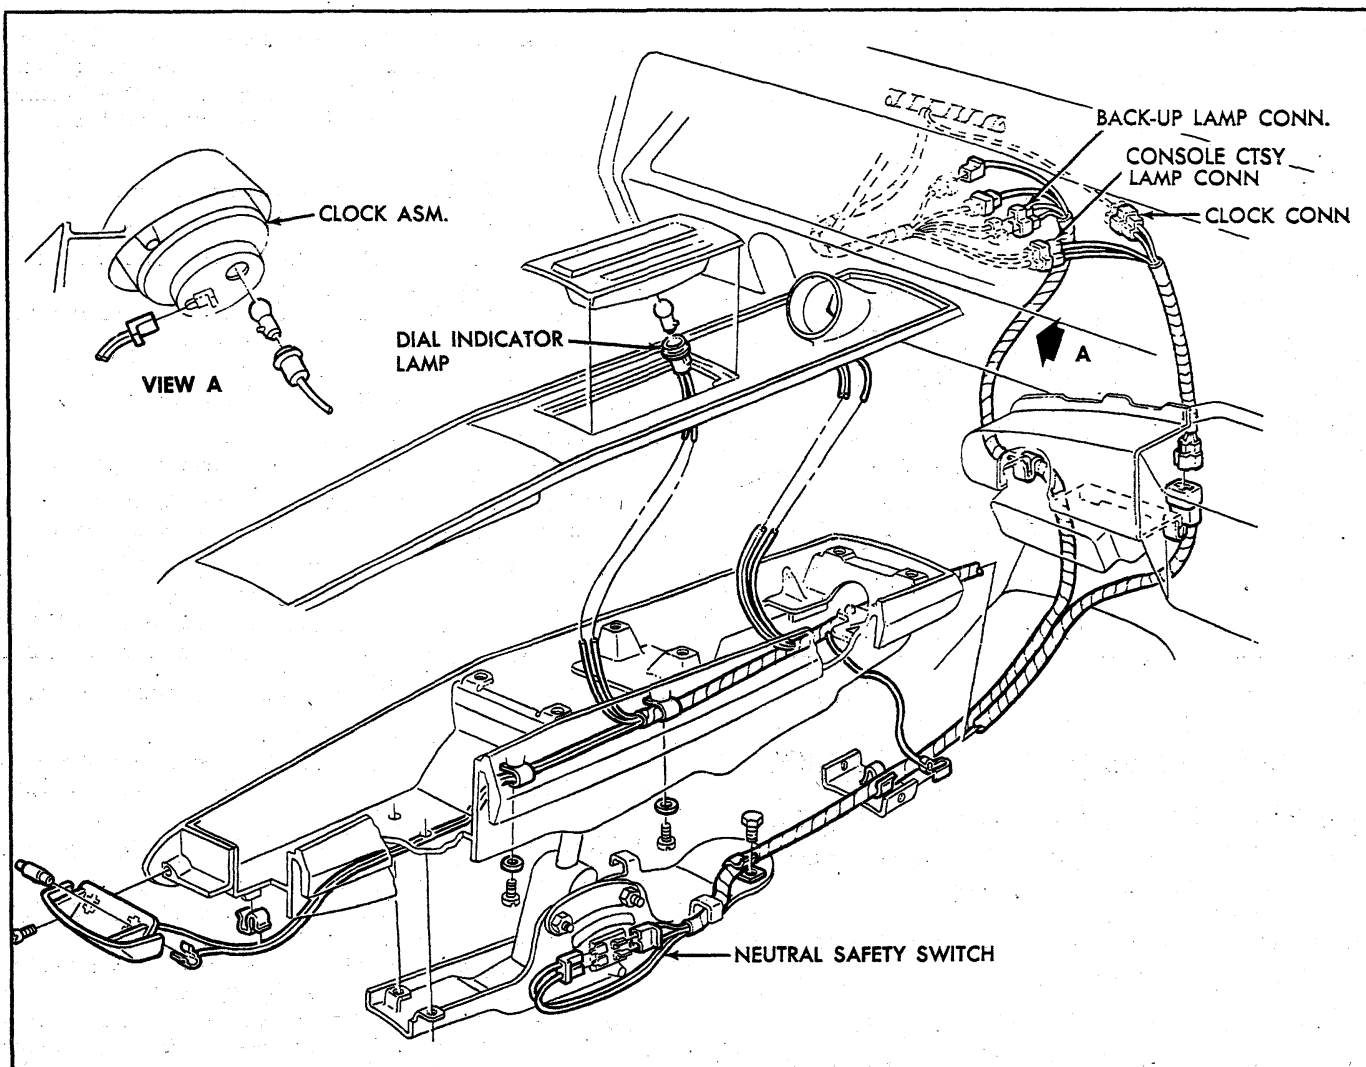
AutoTrans -- Seat Separator Wiring -- Chevelle
